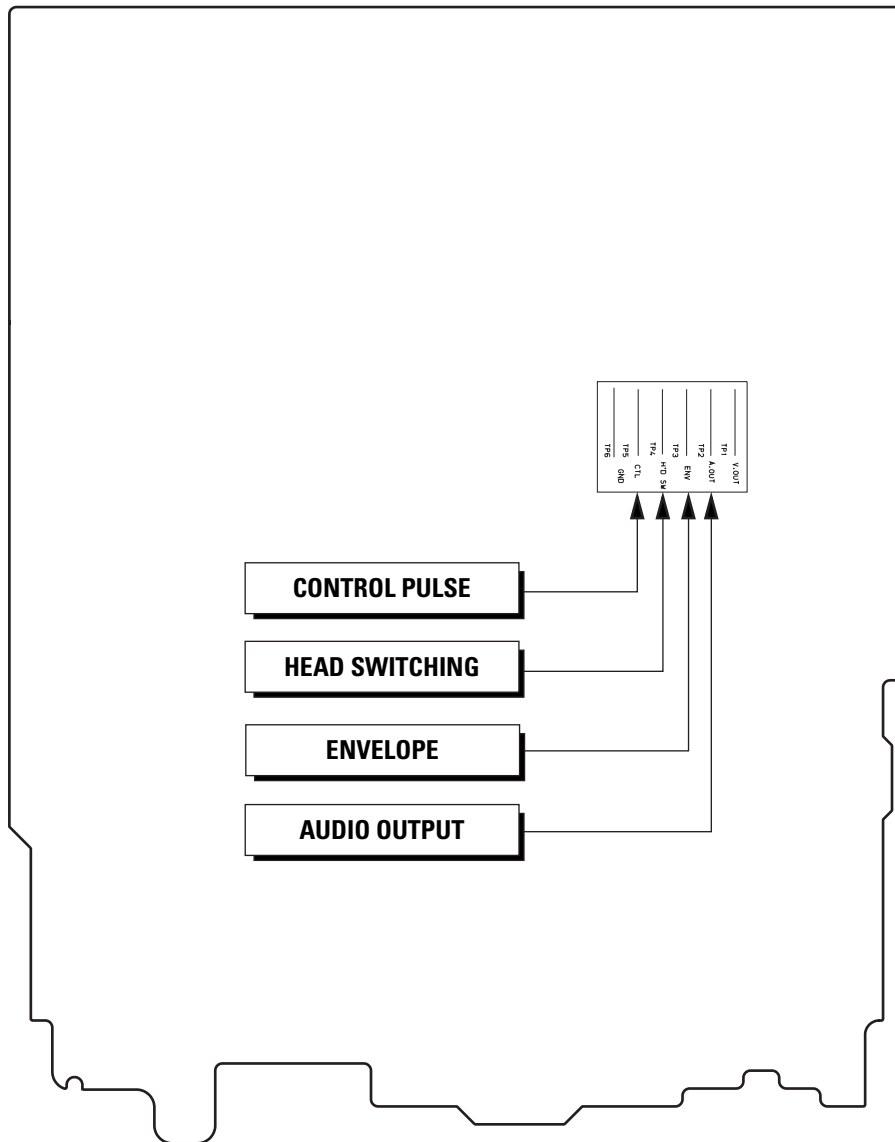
Location of Test point (VCR Main PCB-Top View)
